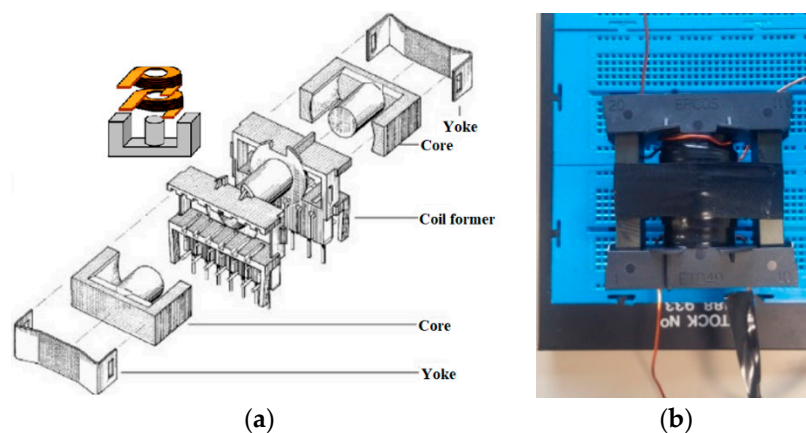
(a) Exploded drawing of the coupled inductor; (b) picture of assembled inductor.
